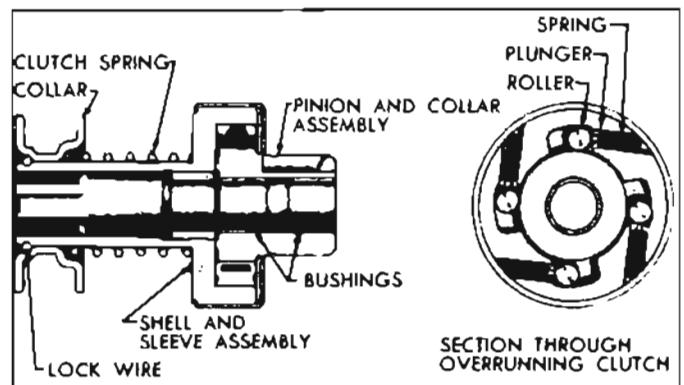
Cranking Motor Drive Assembly, Sectional Views
